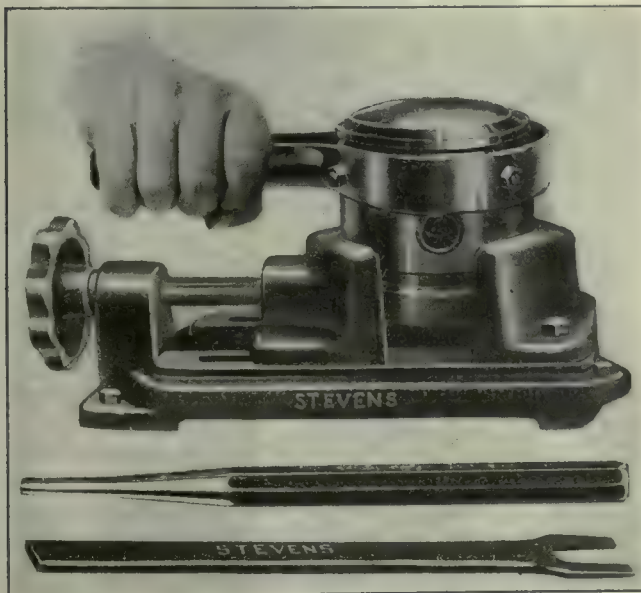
STEVENS "SPEED UP" PISTON VISE, GROOVE CLEANER, PUNCH AND PRONGS
